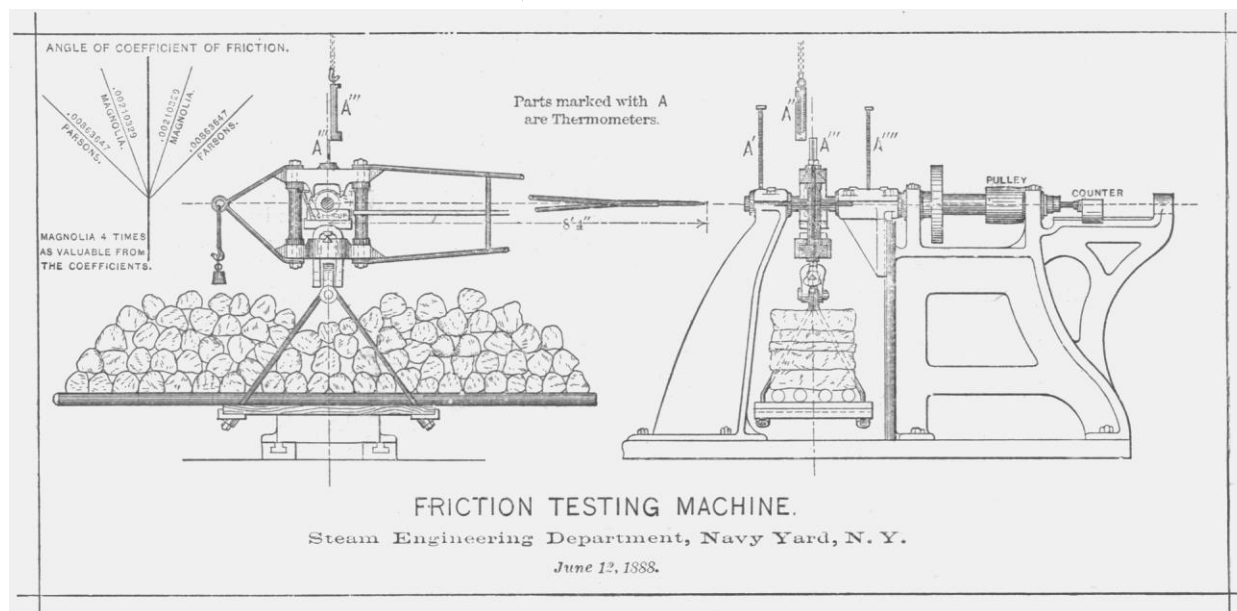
APPARATUS USED IN TESTING MAGNOLIA-METAL.
